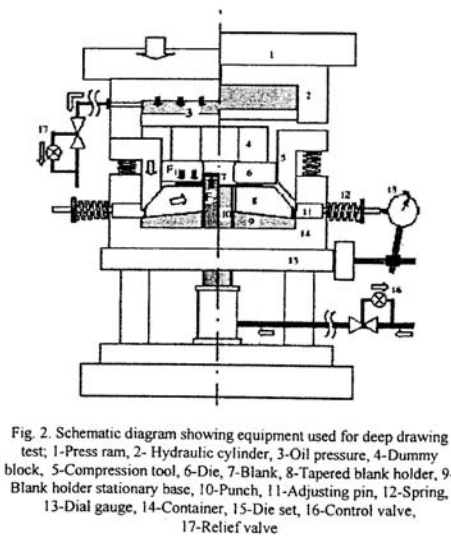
Schematic diagram showing equipment used for deep drawing test; 1-Press ram, 2- Hydraulic cylinder, 3-Oil pressure, 4-Dummy block, 5-Compression tool, 6-Die, 7-Blank, 8-Tapered blank holder, 9-Blank holder stationary base, 10-Punch, 11-Adjusting pin, 12-Spring, 13-Dial gauge, 14-Container, 15-Die set, 16-Control valve, 17-Relief valve
